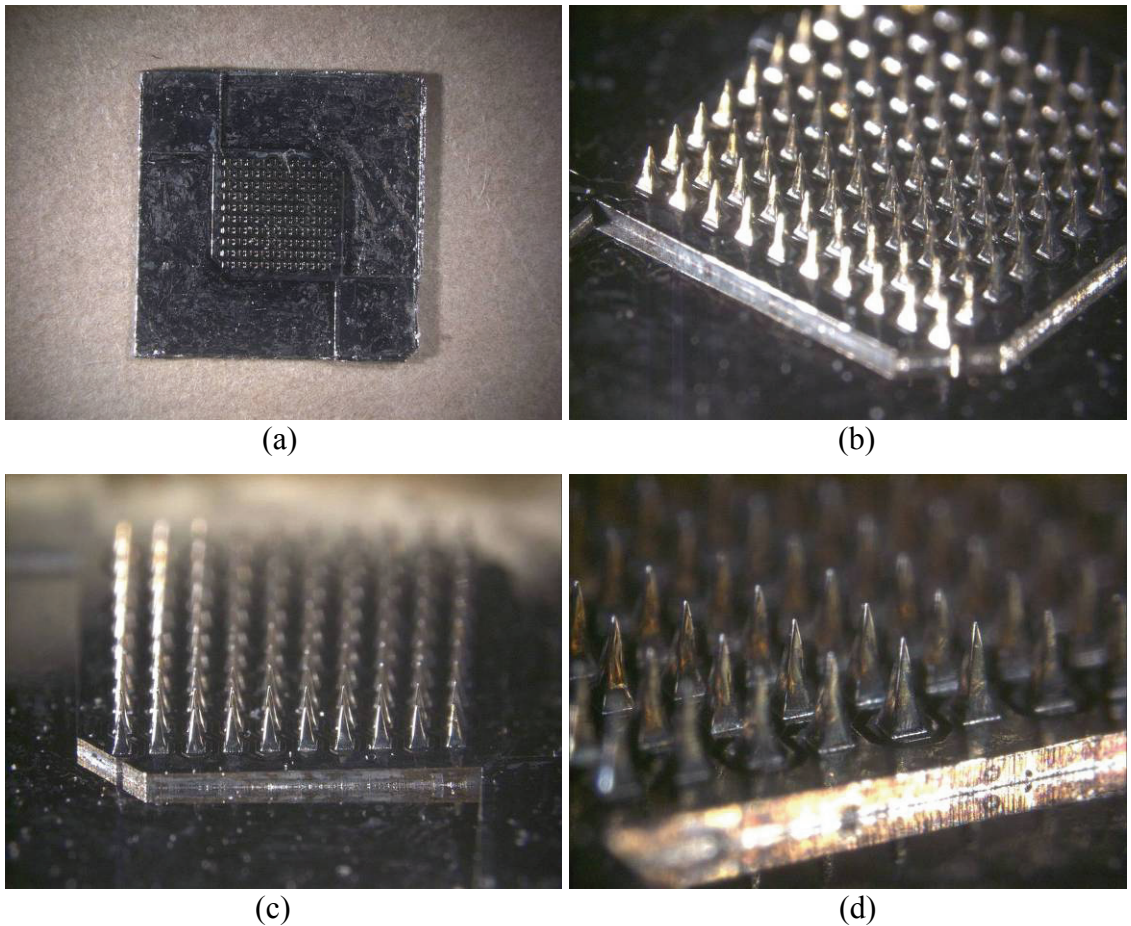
Fabricated Ni master structure; (a) overall view from the top, (b) oblique view, (c) side view, and (d) close-up view of (c)
